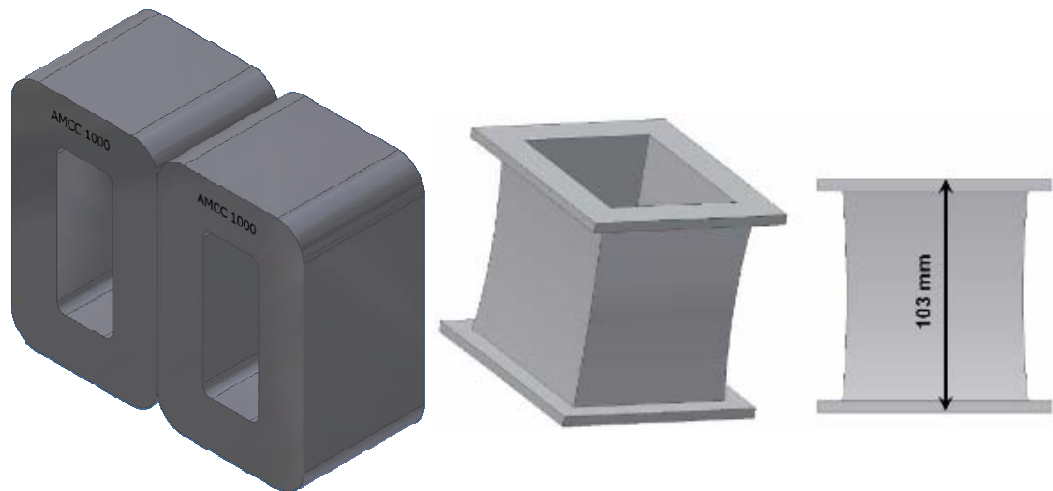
Magnetic switch core configuration and center bobbin dimension.
